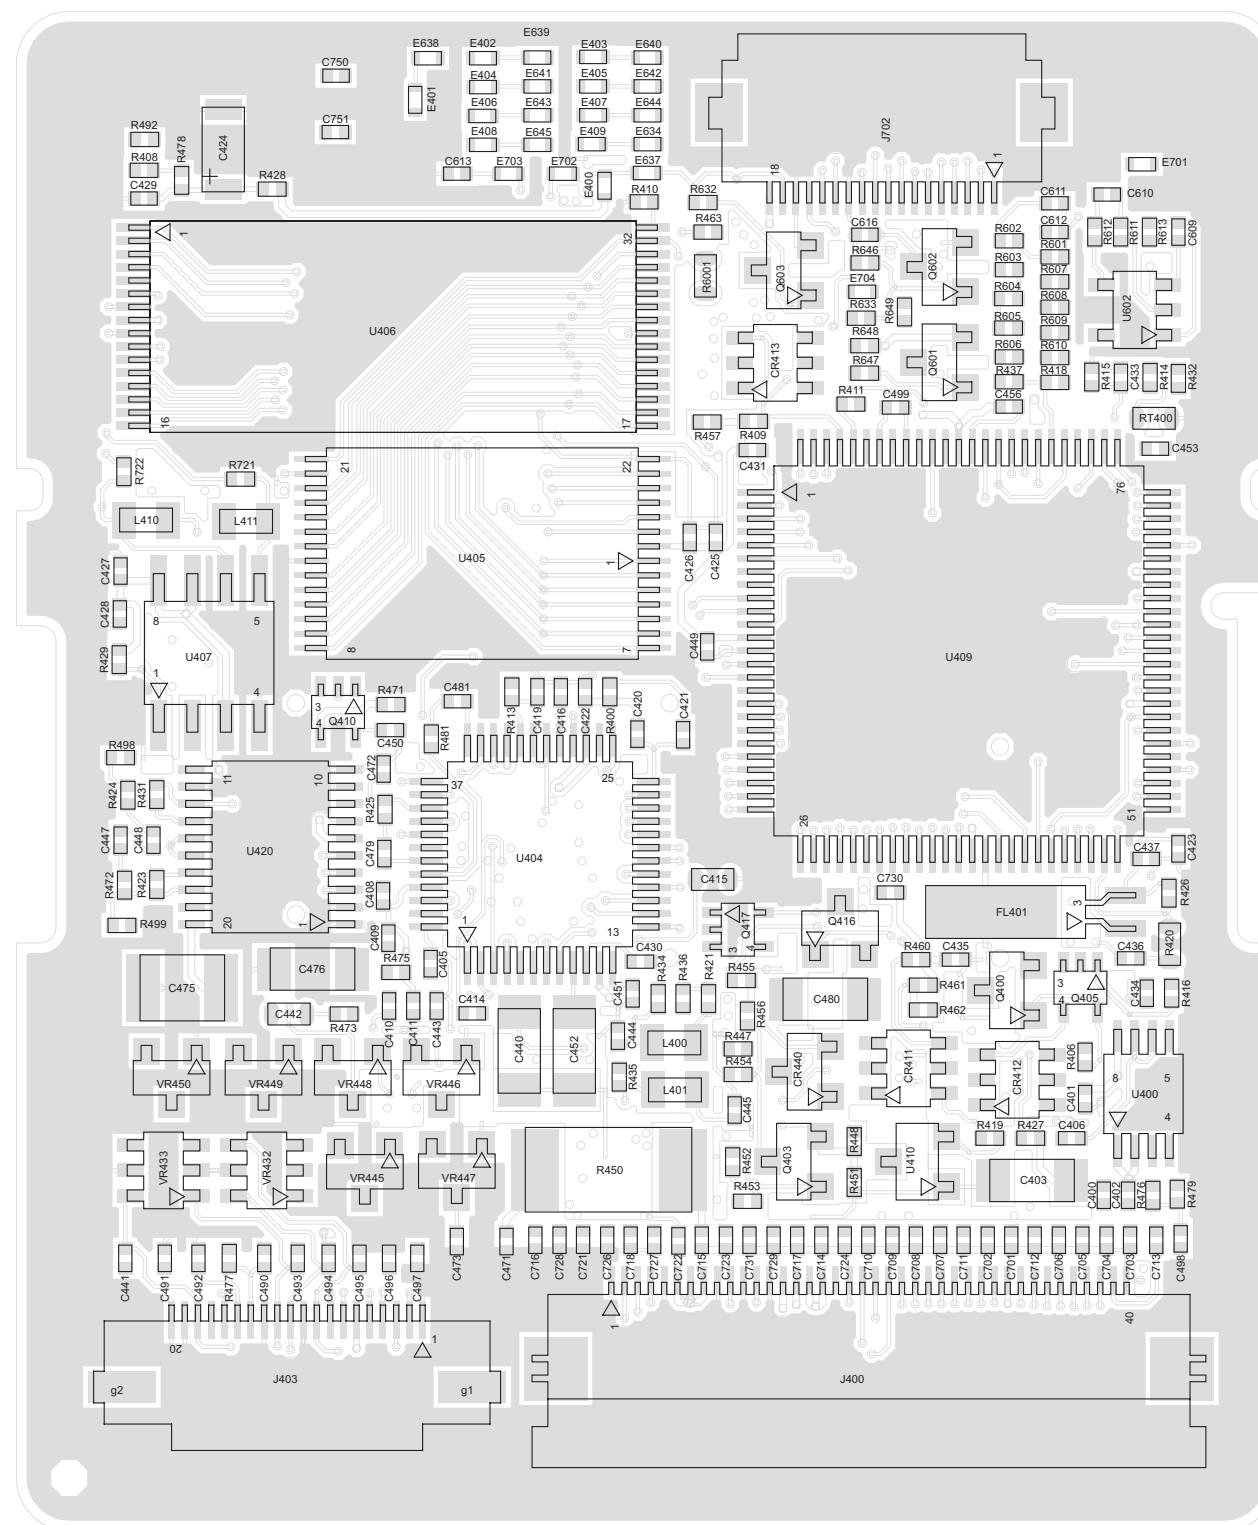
Controller Board Bottom View (PCB No. 8471679L01)
